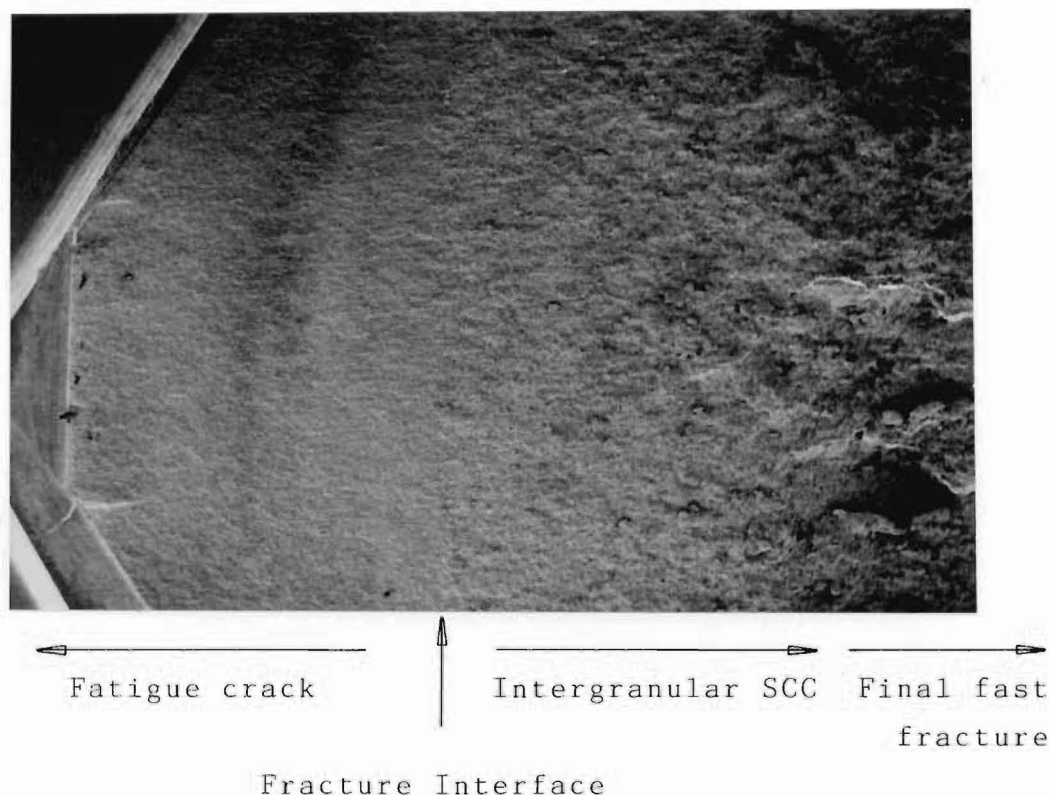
Fracture modes found on fracture surface of CT SCC specimen.
